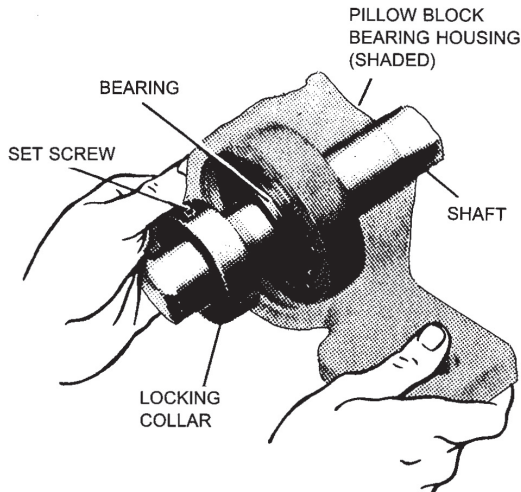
BEARING WITH ECCENTRIC CAM
